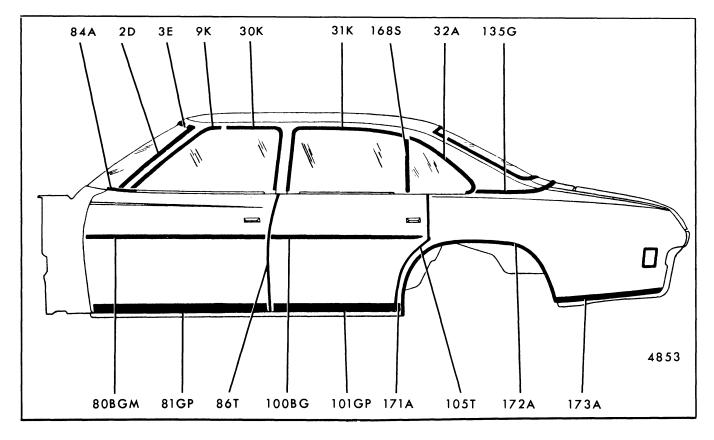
Chevrolet 1AE29 Styles (1AD, 1AC29 Similar)
